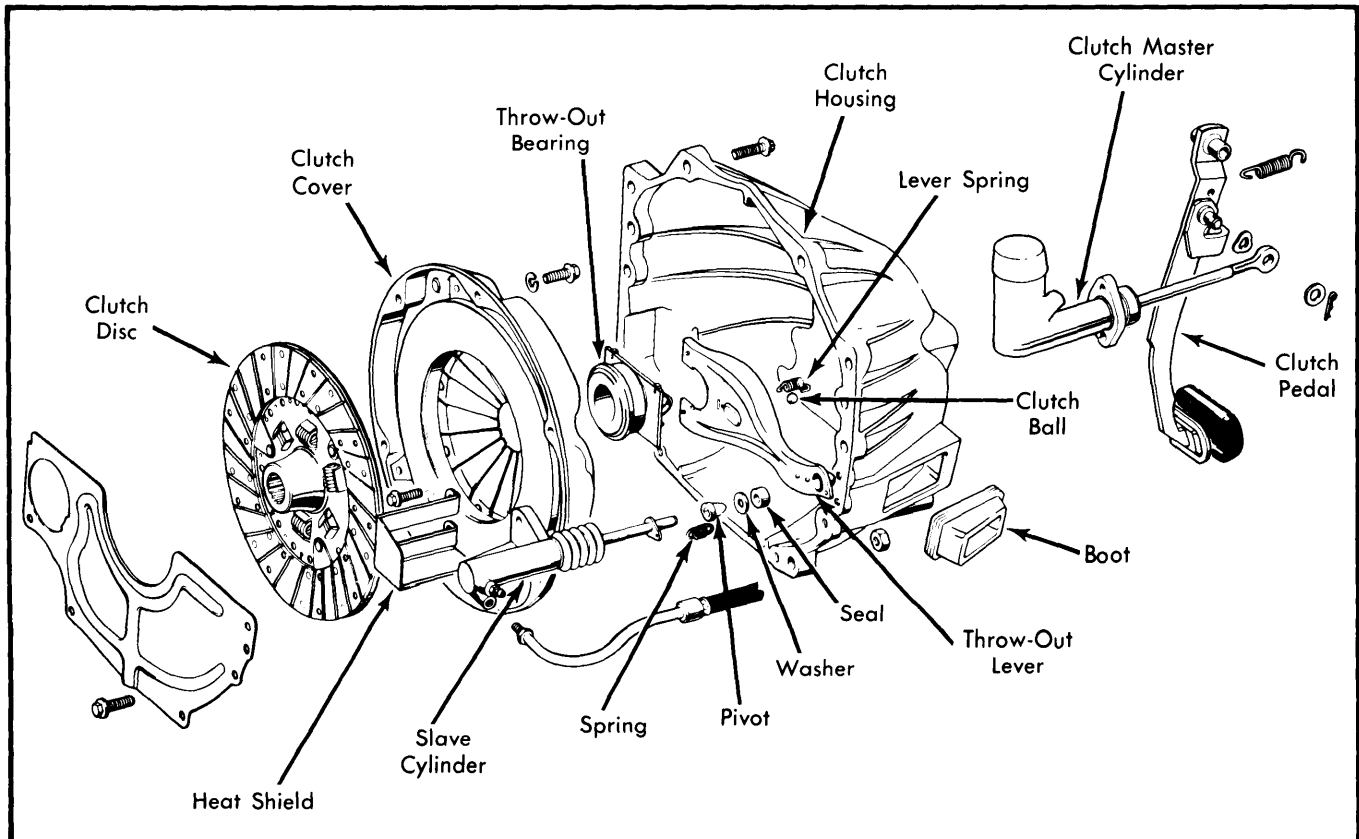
Exploded View of Jeep Hydraulic Clutch Assembly ("CJ" Models With 4 Cylinder Engine)
